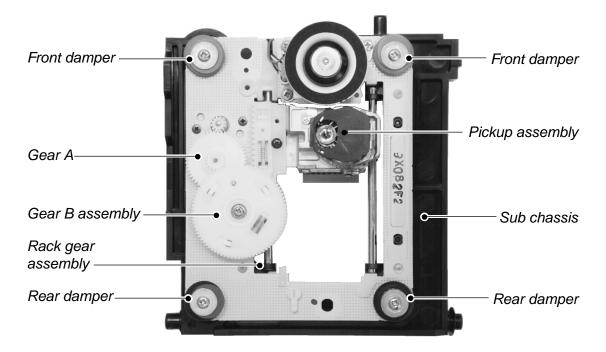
Pickup mechanism chassis assembly (Top side)
